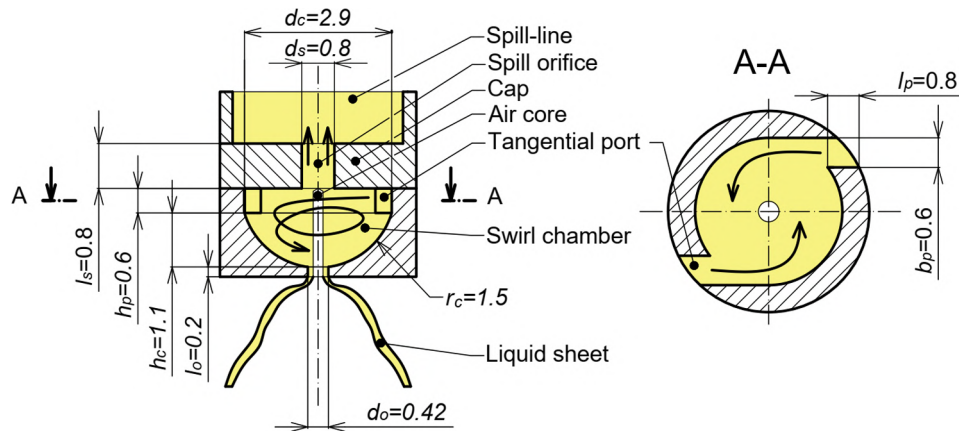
Sketch of the original SRA (C4) with the main dimensions given in millimetres; side section (left) and top section (right).
